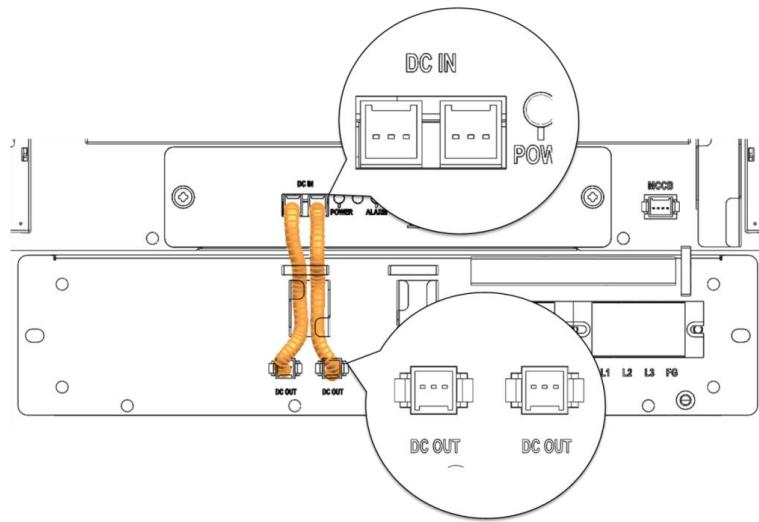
DC Power Cables from SMPS Assembly Type B to SMU
